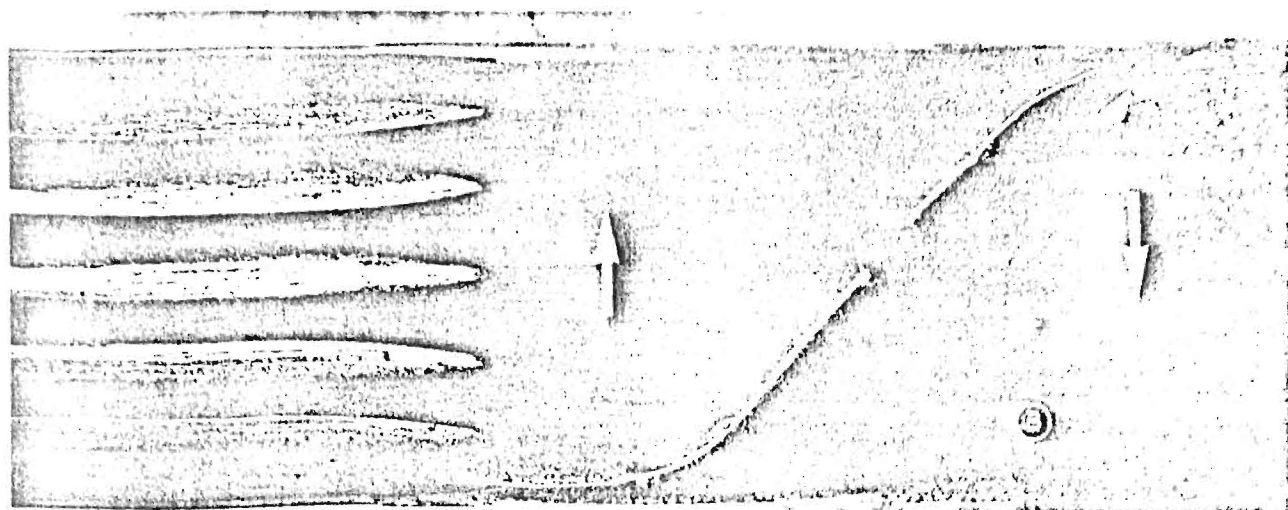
B — Surface of shaft with a torsional fatigue fracture originating at a transverse hole which acted as a stress concentration in a case hardened steel which had a surface hardness of about HRC 60. Note that the fatigue crack was at the characteristic 45° angle as it progressed in both directions from the hole. (Crack visibility was enhanced with iron powder.)
